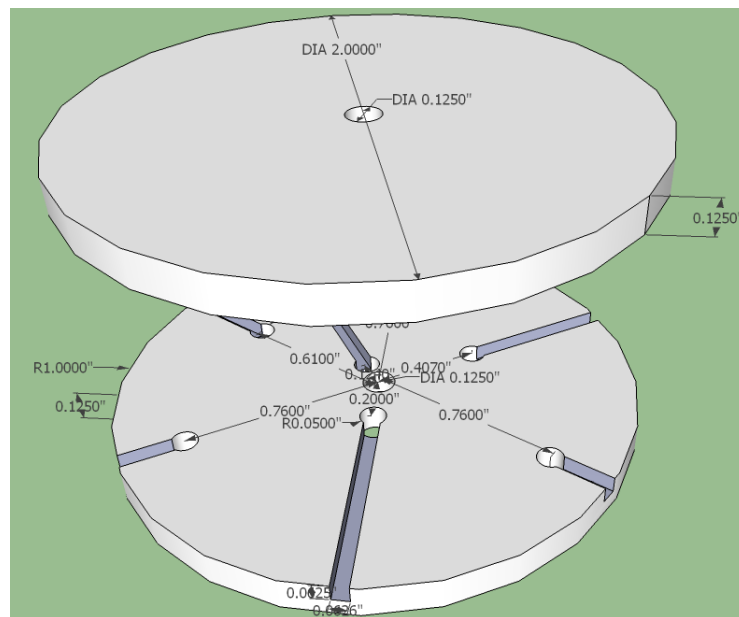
Detailed two part lid system designed for use with the CHTA, all dimensions are given in inches.
